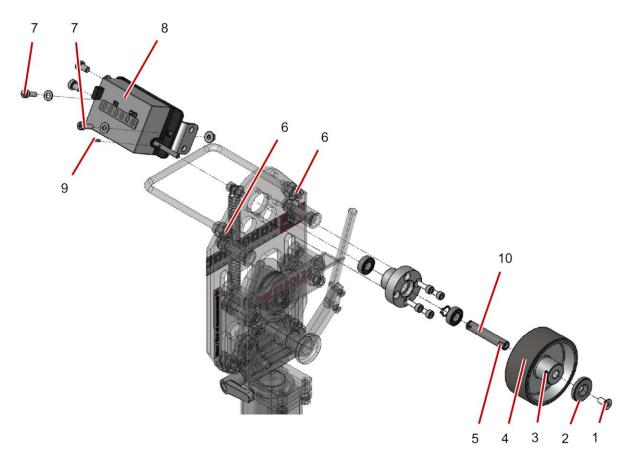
Replacing the counter / measuring wheel MESSBOI 25
